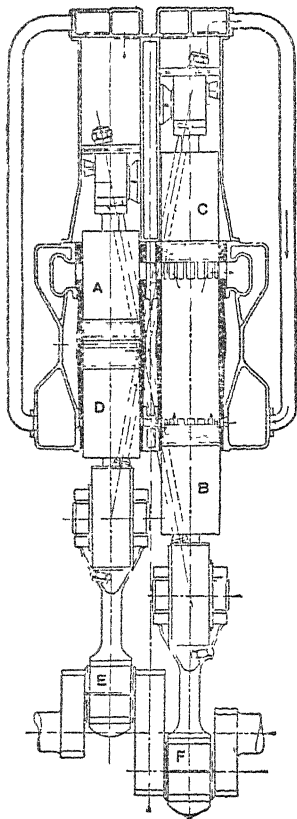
Arrangement of cross-connected pistons in full-sized engine
